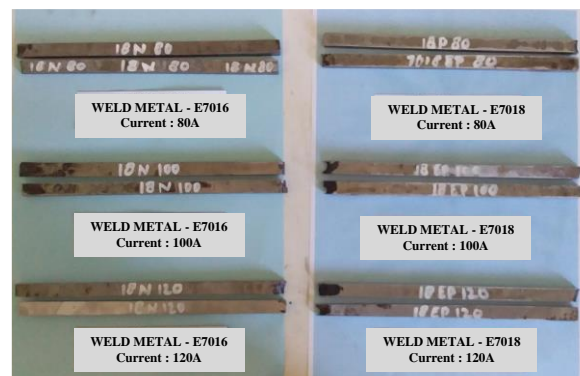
Weld metal elektrode E7016 and E7018
